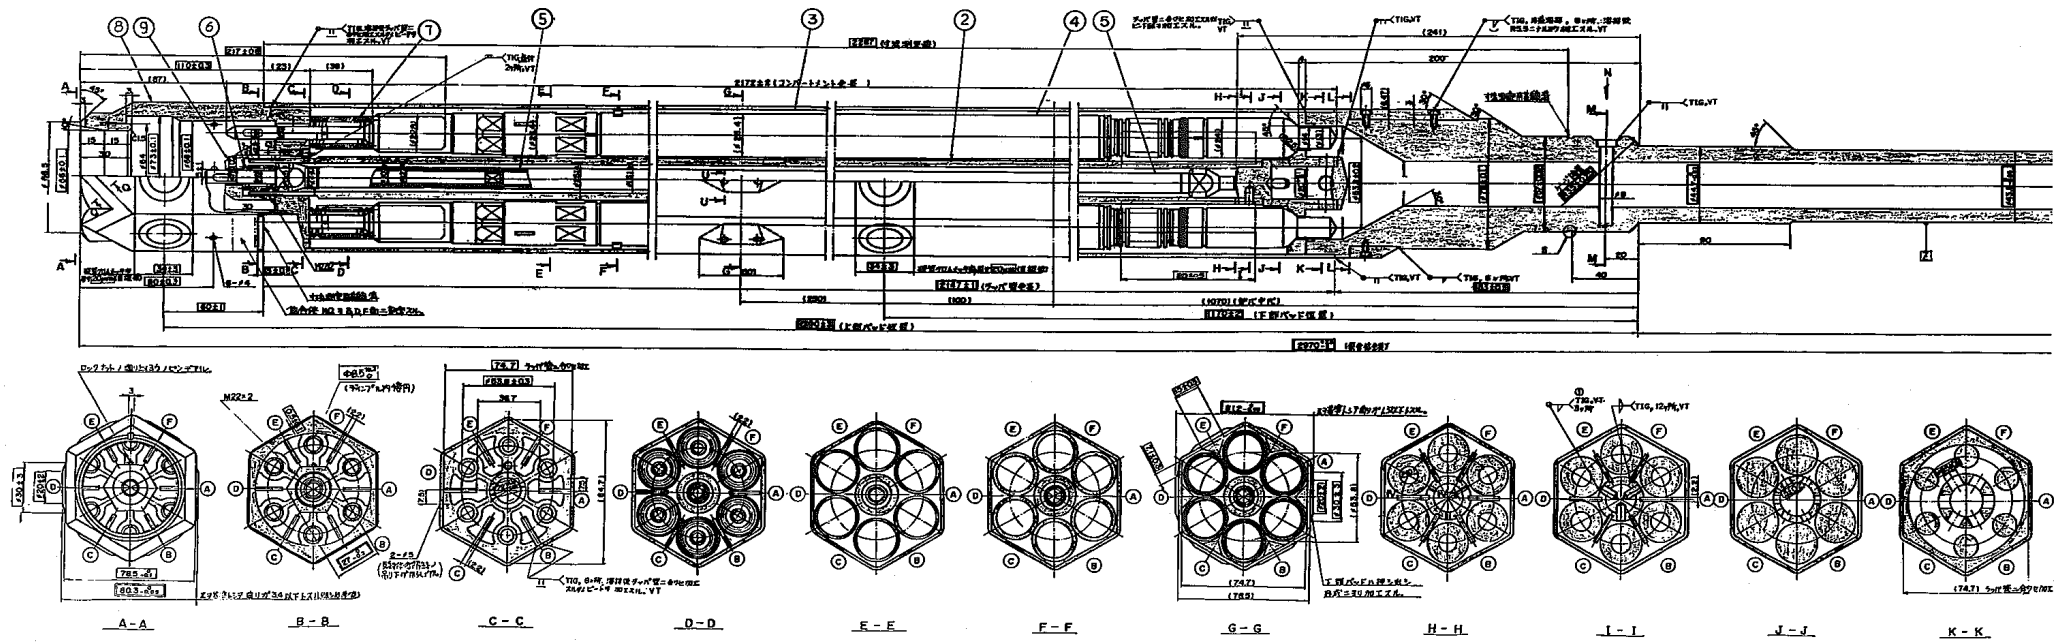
CMIR Irradiation Test Assembly (1)
